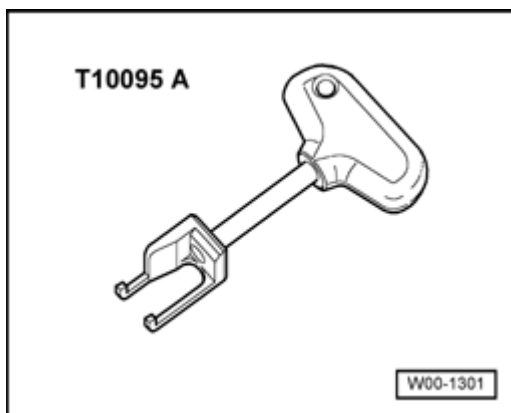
Identifying Puller For Ignition Coil T10095 A
